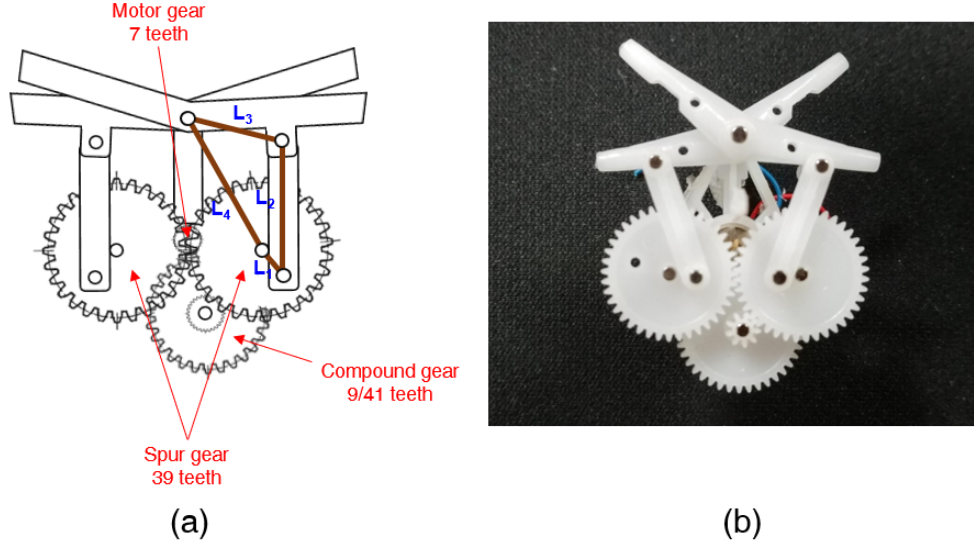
Flapping-wing gearbox; (a) Configuration of gears and links, (b) Real picture of gearbox.
